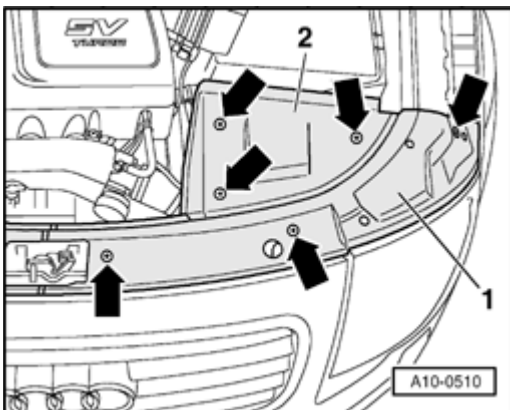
Removing Left-Hand Cover Panels On Lock Carrier And Battery
